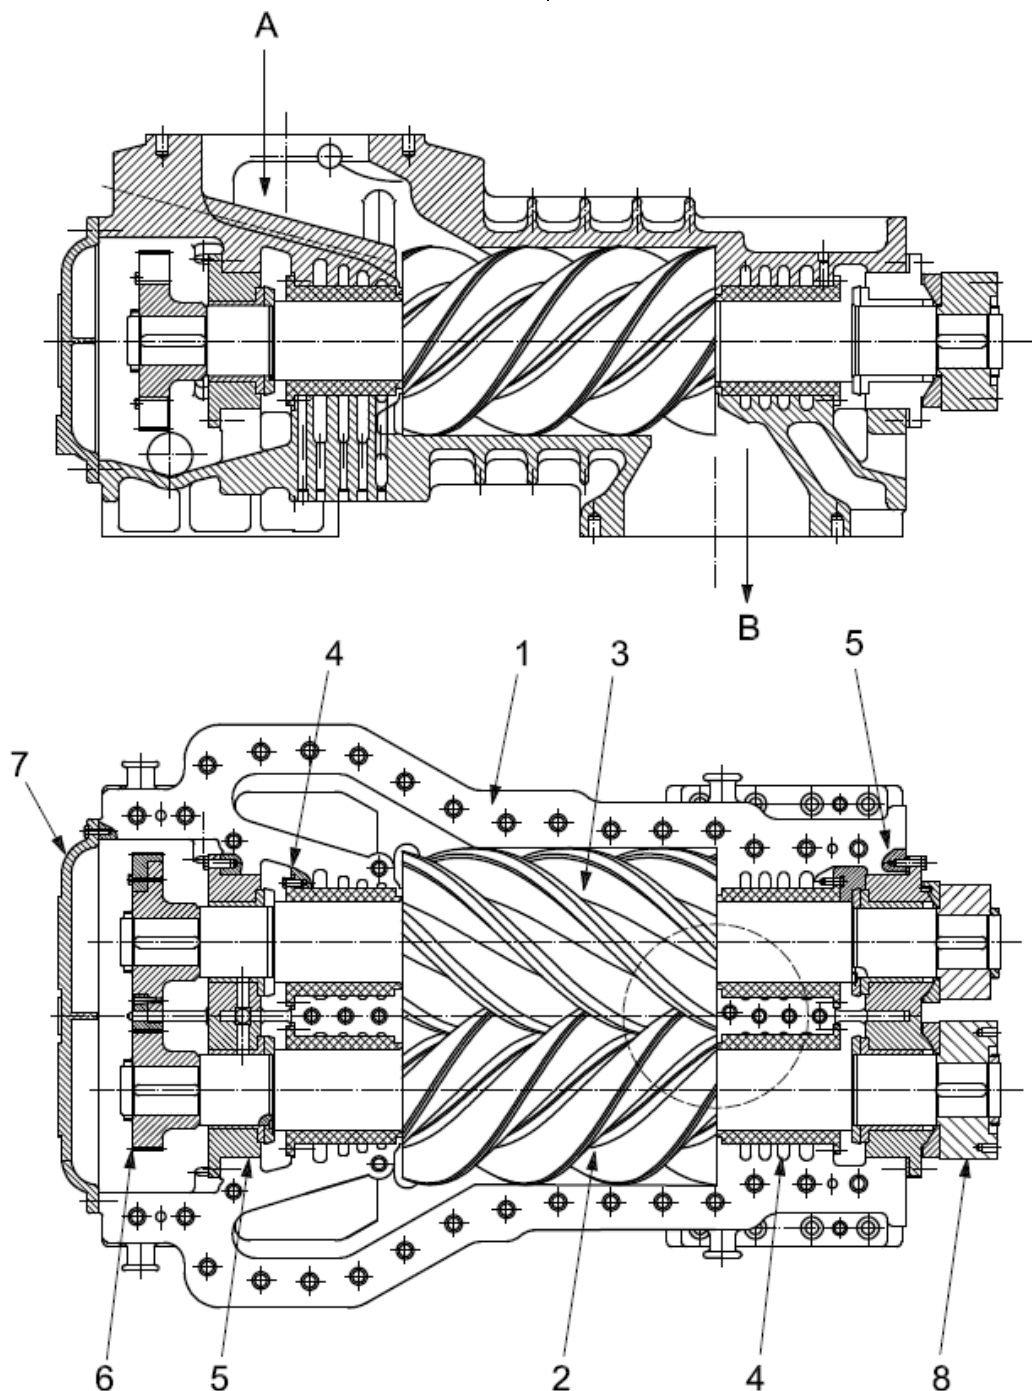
SECTIONS THROUGH DRY SCREW COMPRESSOR
